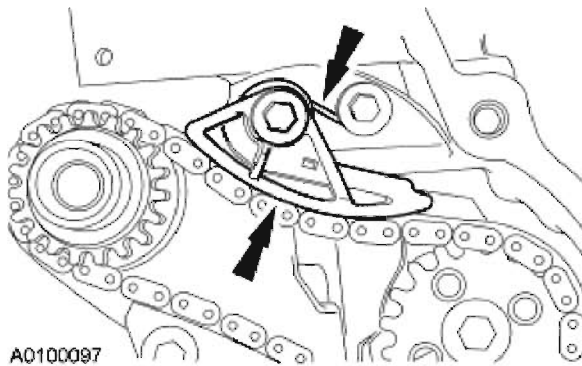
Locating Oil Pump Chain, Sprocket & Bolt
